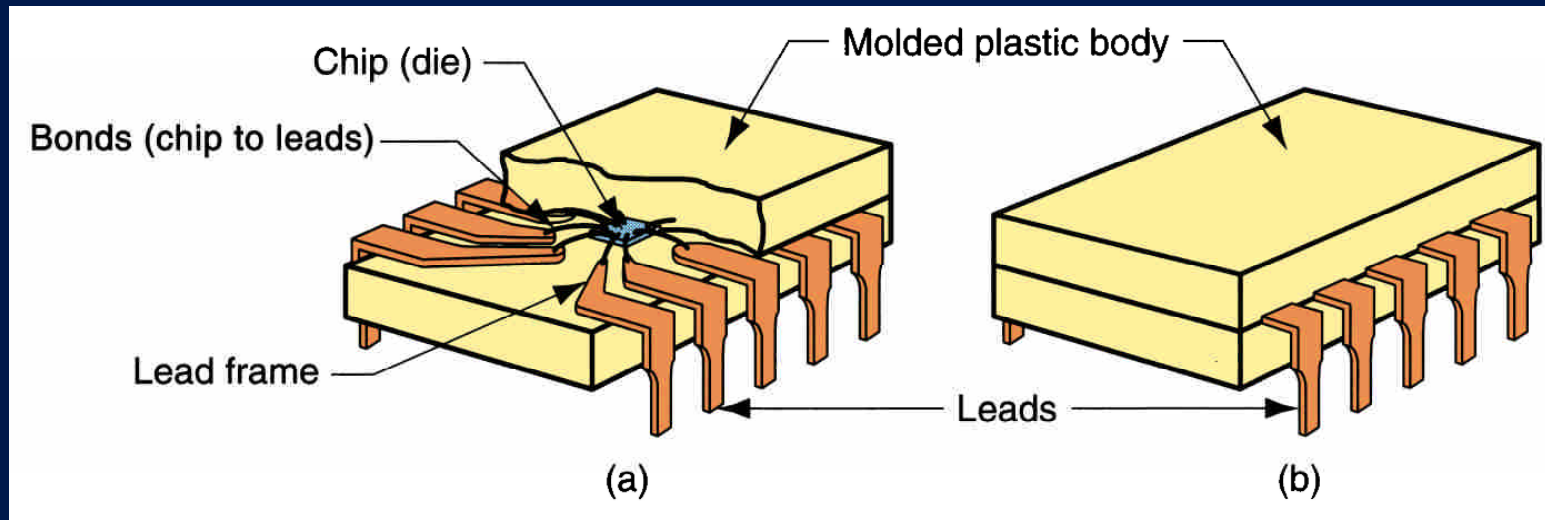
Packaging of an integrated circuit chip: (a) cutaway view showing the chip attached to a lead frame and encapsulated in a plastic enclosure
